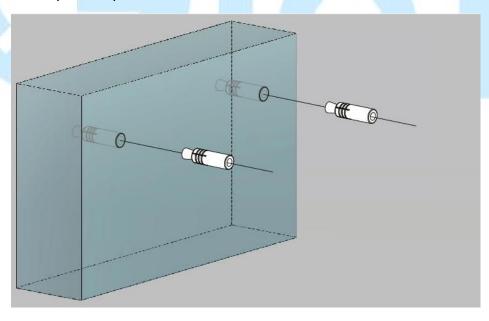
Installation Diagram of Wall Mount Anchors (Stainless Steel)
